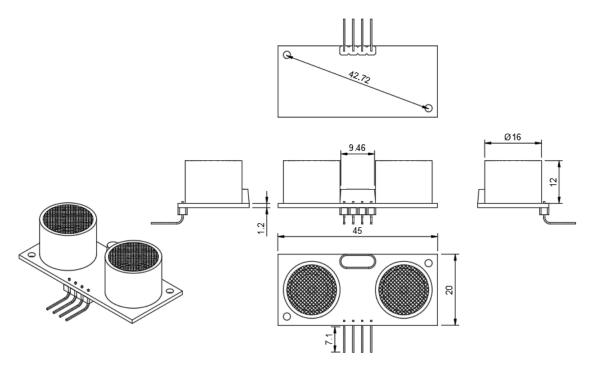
Mechanical Drawing of Ultrasonic Sensor
